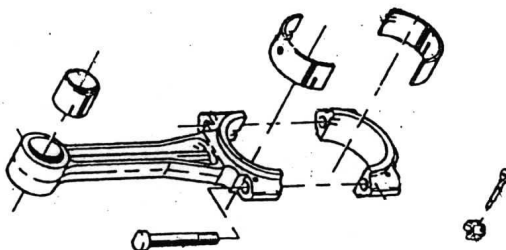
CONNECTING ROD AND CAP WITH BEARING
